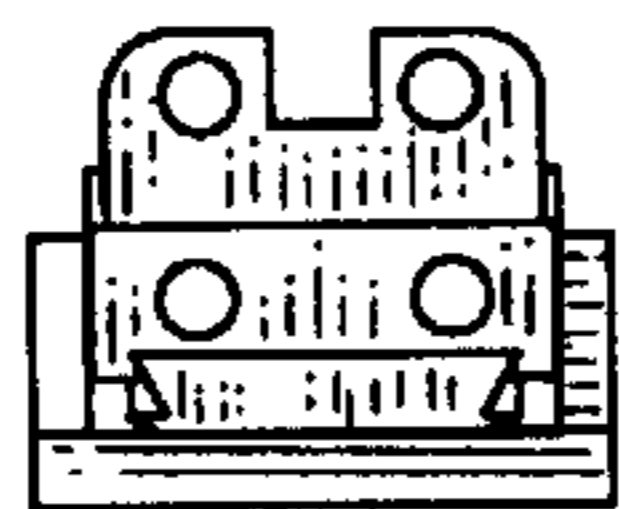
is a view in rear perspective, showing the design for an adjustable rear sight for a shotgun with a dovetail base. FIG. 2 is a view in rear elevation thereof. FIG. 3 is a top view thereof. FIG. 4 is a bottom view thereof. FIG. 5 is a view in front elevation thereof. FIG. 6 is a view in left side elevation thereof; and, FIG. 7 is a view in right side elevation thereof.
